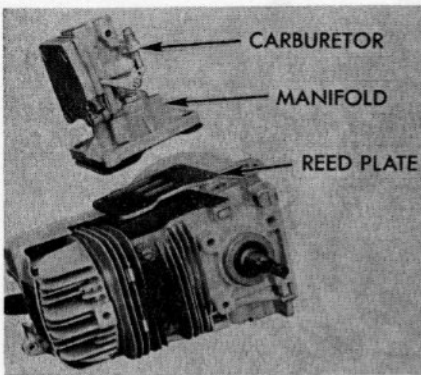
View of carburetor and manifold removed from Model MC-8 engine showing reed plate. Refer to Fig. MC19 for exploded view of reed plate assembly.
